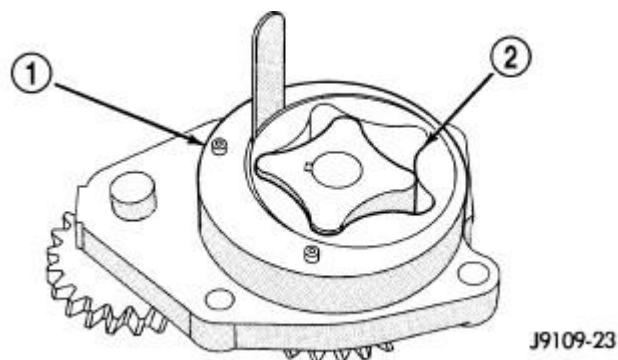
Measuring Gerotor Planetary to Body Bore Clearance
